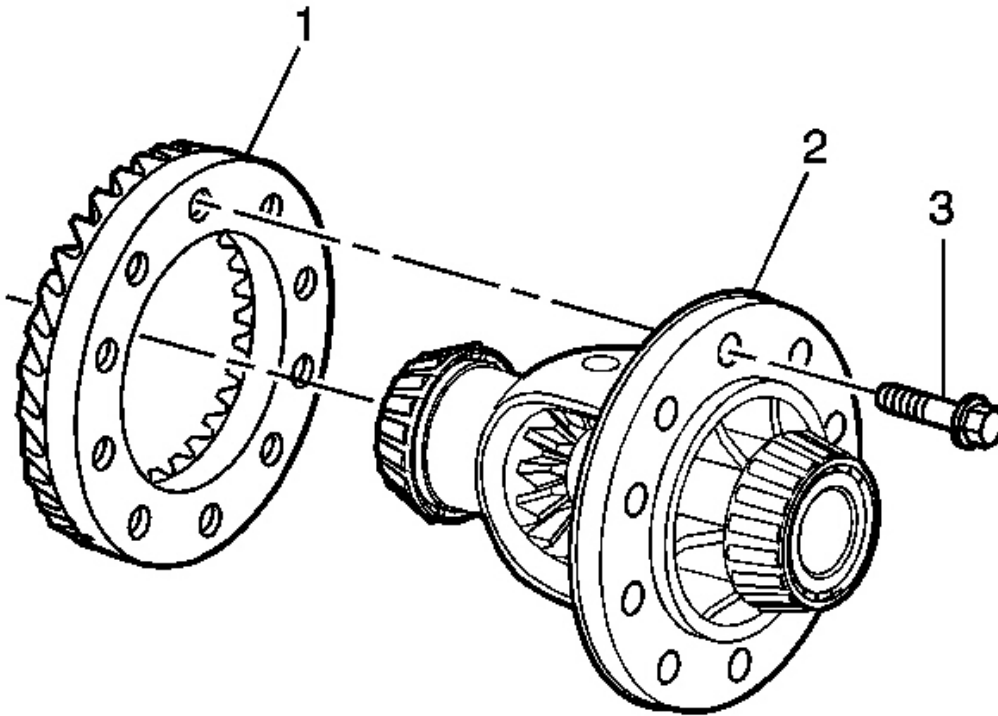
Removing Bolts & Ring Gear From The Carrier
